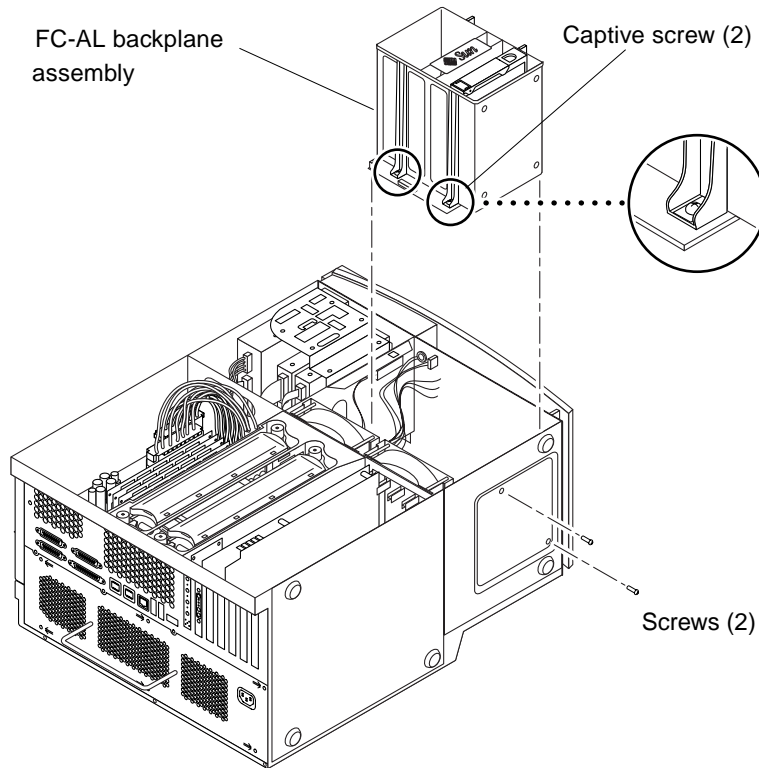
Removing and Replacing the FC-AL Backplane Assembly
